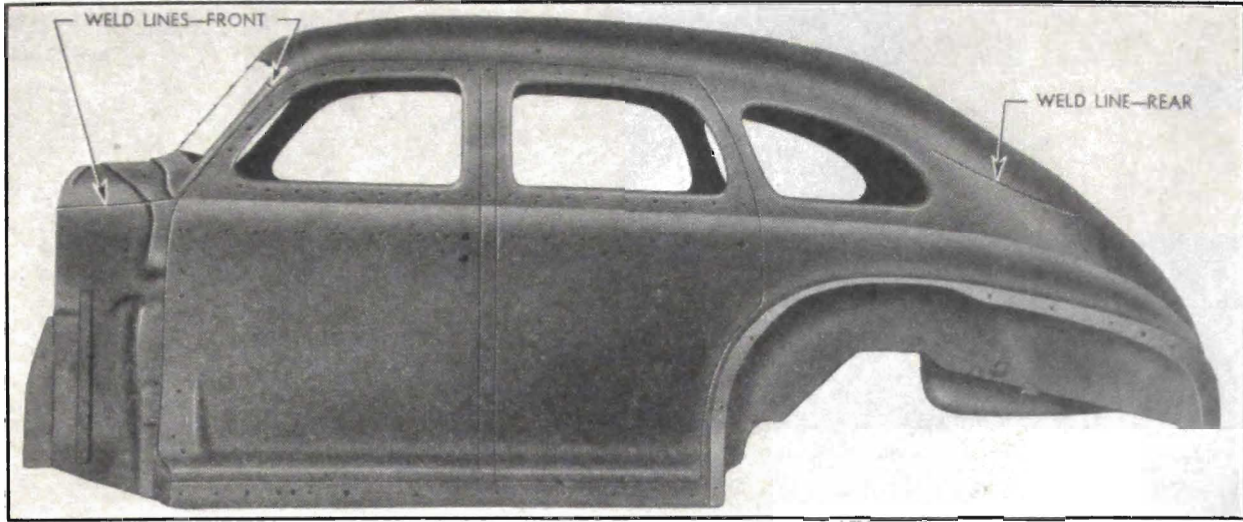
Sedan Body Showing Welding Lines—Series 40-60
